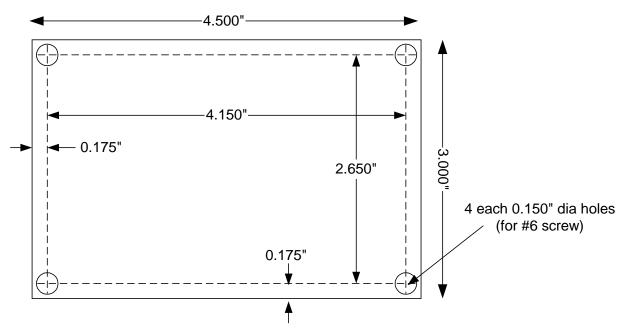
PMDX-121 Dimensions and Mounting Holes
